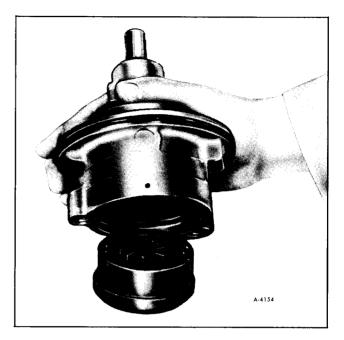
Removal of Shaft, Pressure Plate, Pump Ring, Vanes and Rotor
